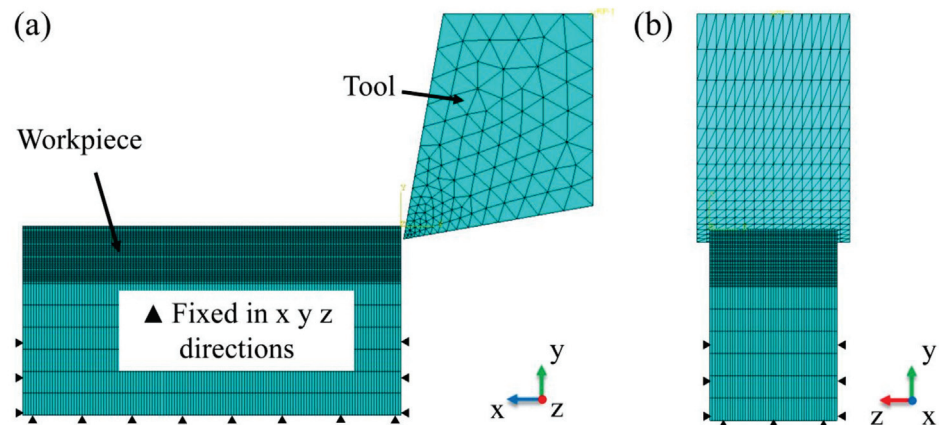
3D finite element cutting model (a) front view (b) left view.
